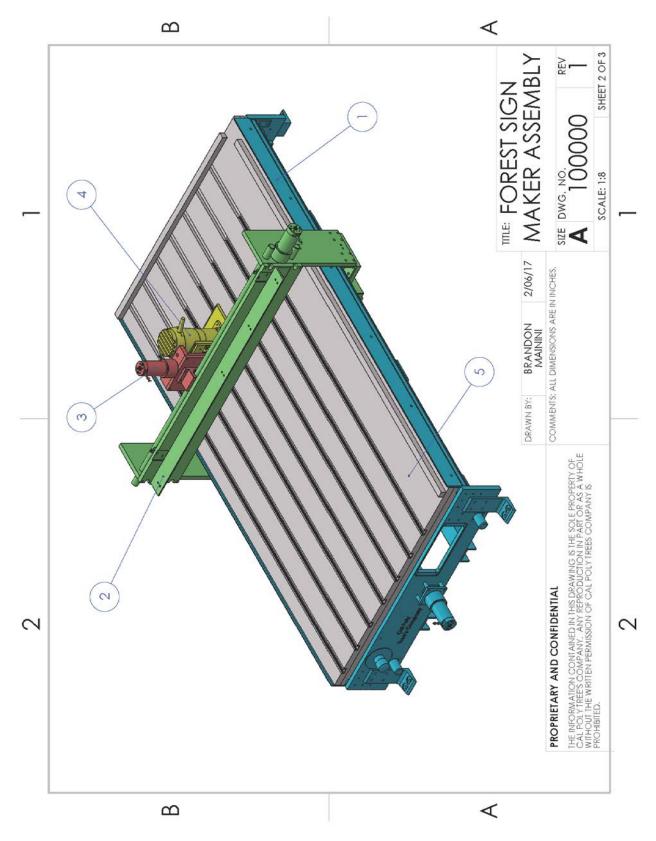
Forest Sign Maker Assembly Detail Drawing (Page 2 of 3)
